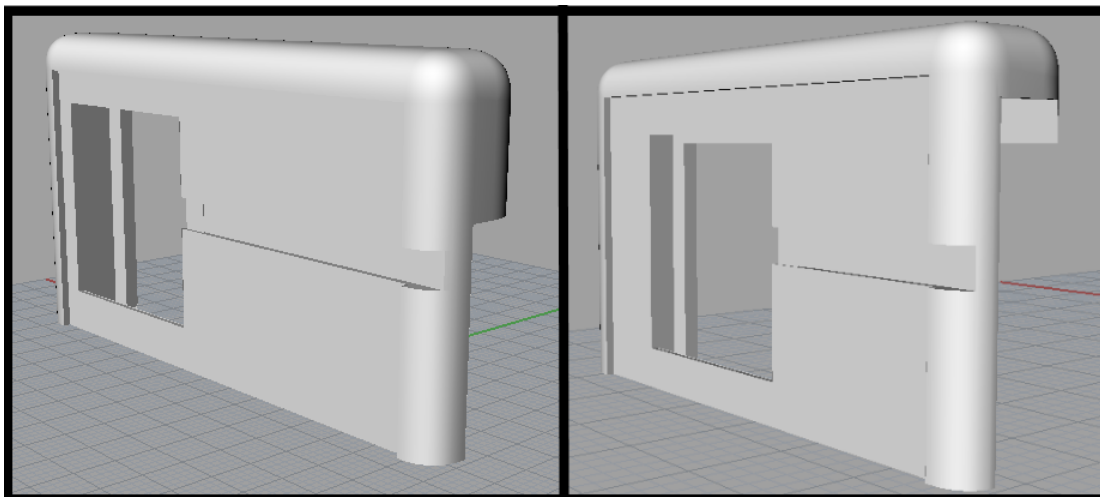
CAD rendering of the clip designed to host the PCB and its USB OTG cable on a Sony Xperia Z3 (left) and Sony Xperia Z3 Compact (right).
